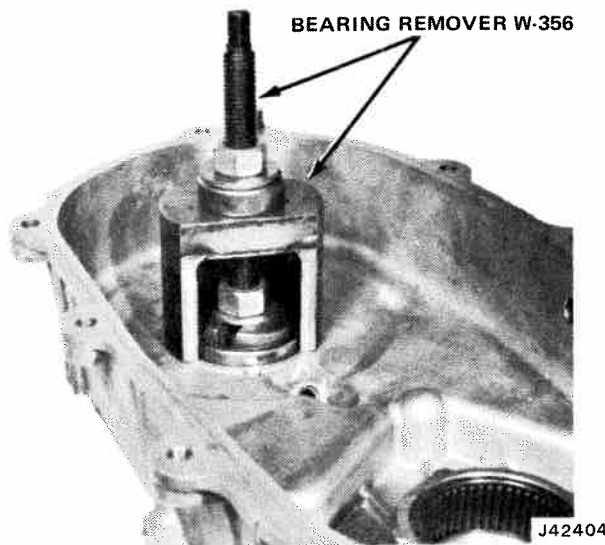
Removing Differential Front or Rear Needle Bearing
